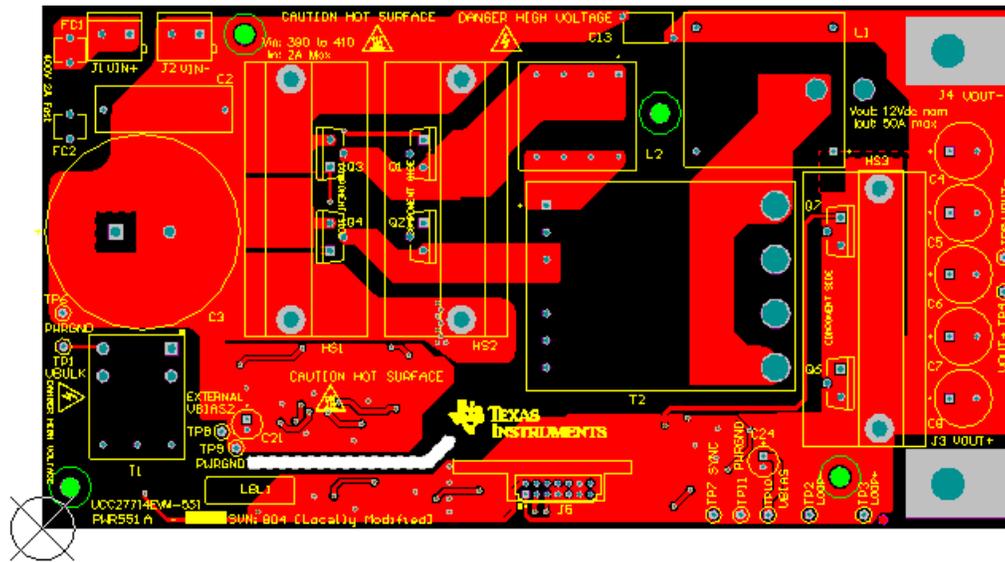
UCC27714EVM-551 Power Stage Top Layer Assembly Drawing (top view)
